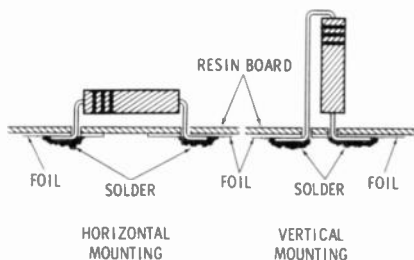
Two methods of mounting components on printed-circuit board.
